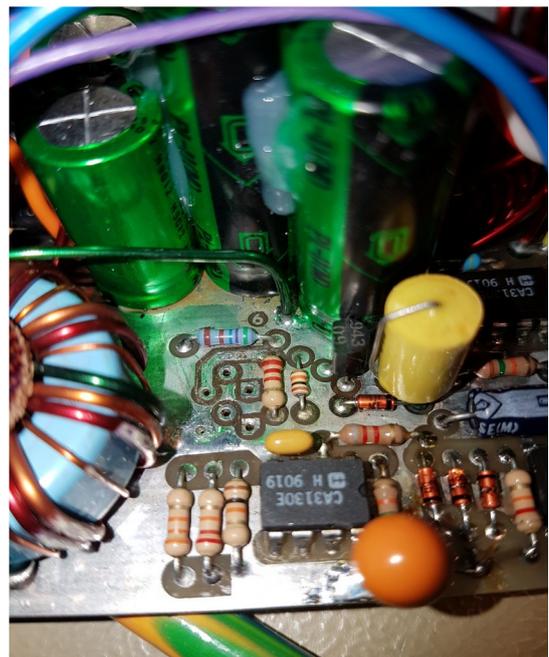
Q12 and Q13 de-soldered, PCB cleaned
